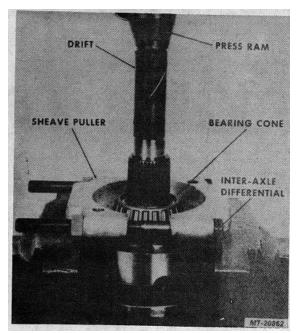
Removing Front Bearing from Inter-Axle Differential
